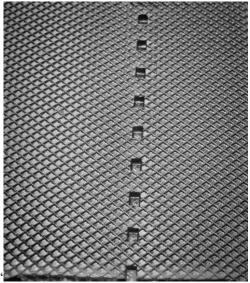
(b) ULTRASONIC WELD MELT POOL
